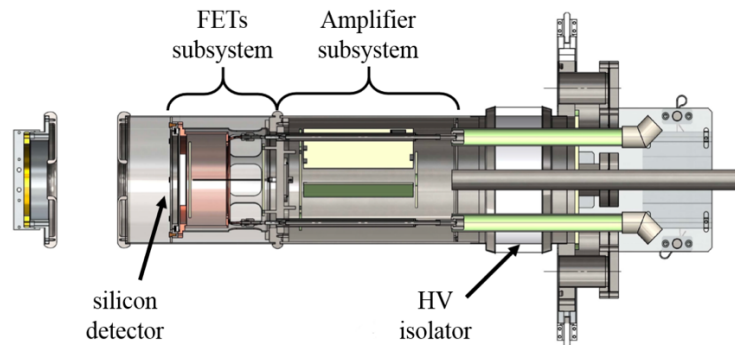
5 A picture of the prototype detector mounting assembly [17].
